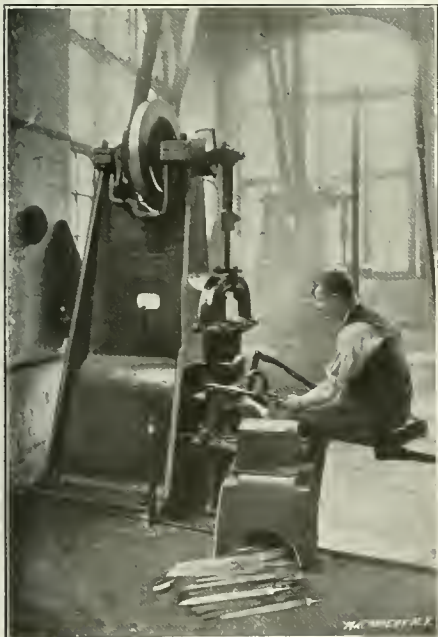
Forging the Blanks by Quick-action Power Hammers superseding the Old Hand Method
